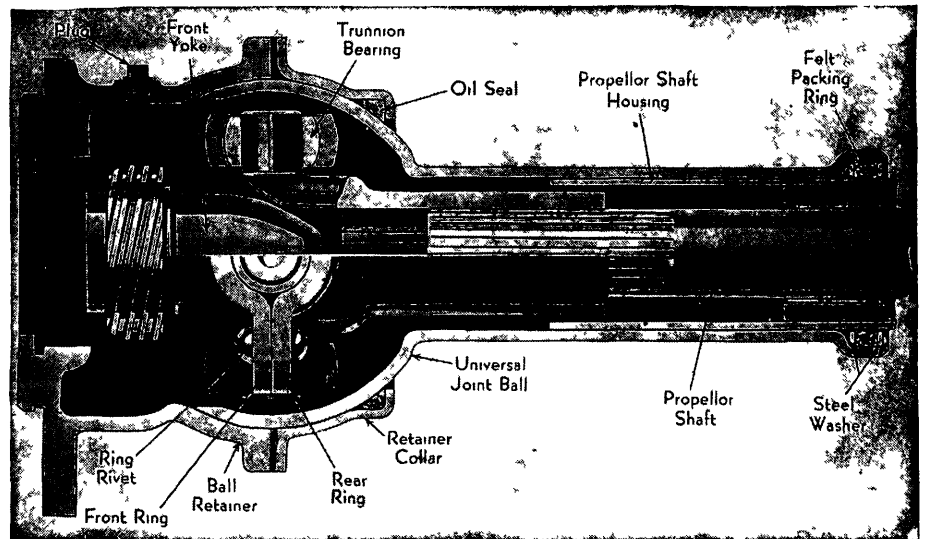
Chevrolet Split Ring Joint with riveted rings
